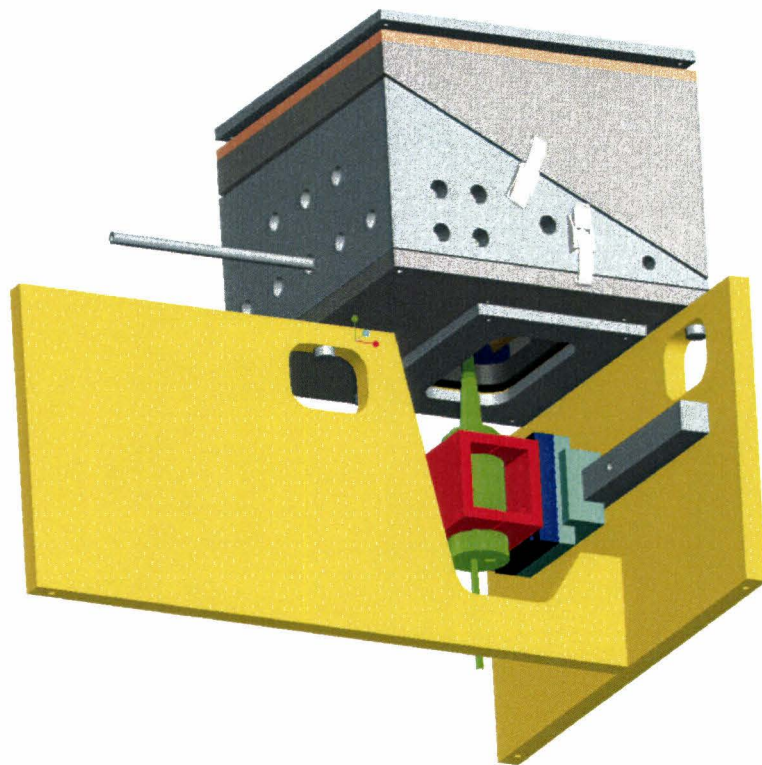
Clam-shell design, including stand and IR thermopile sensor mounted to a linear bearing
